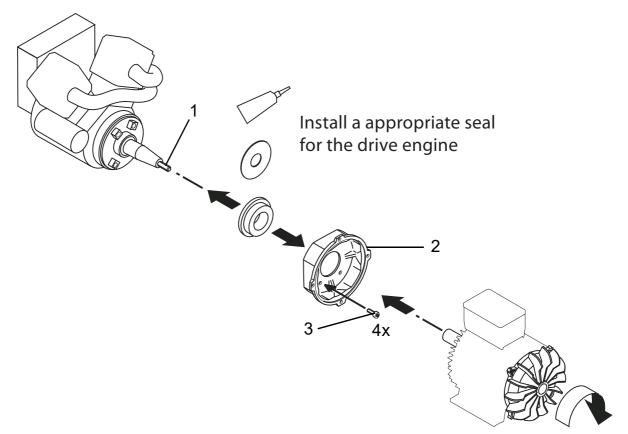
Assembly of brushless single-bearing generators on the motor (1)
